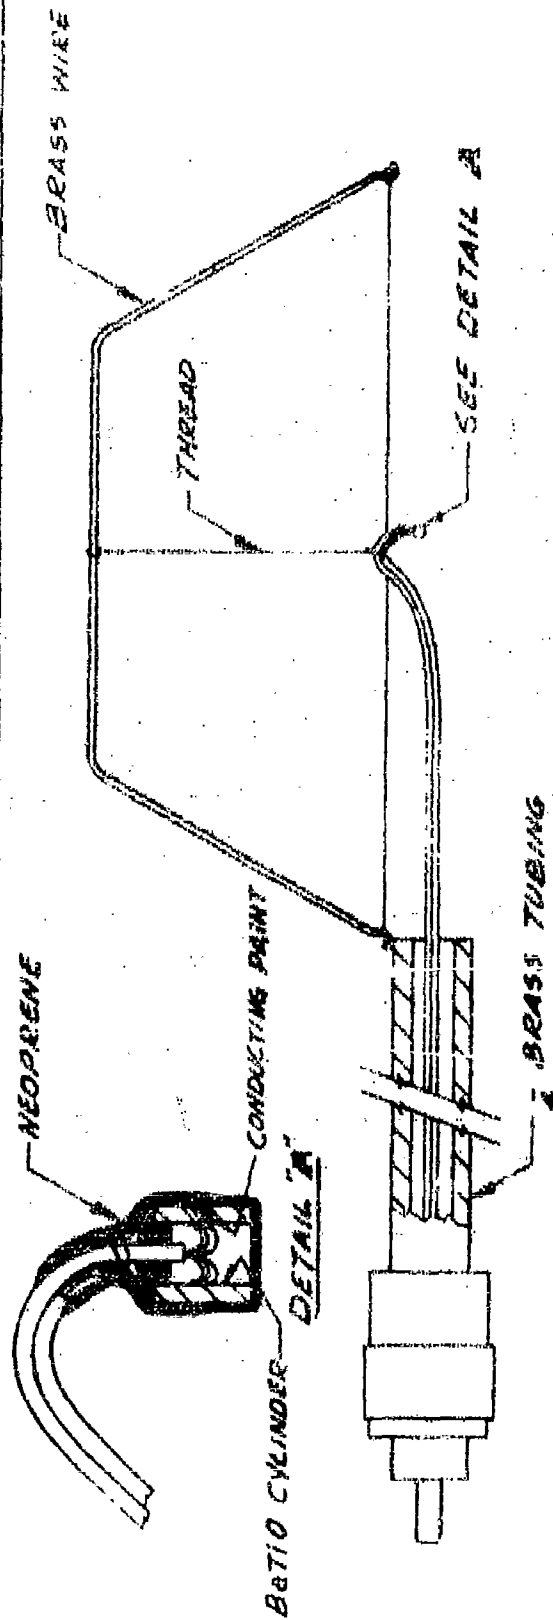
ULTRASONIC PROBE (EXPLODED VIEW)
